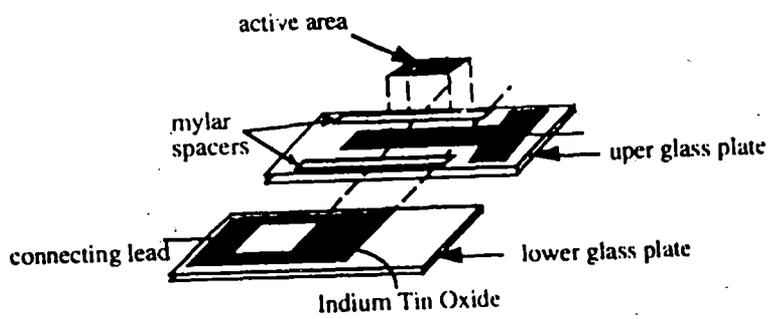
Inner surfaces of the lower and upper conducting glass plates
